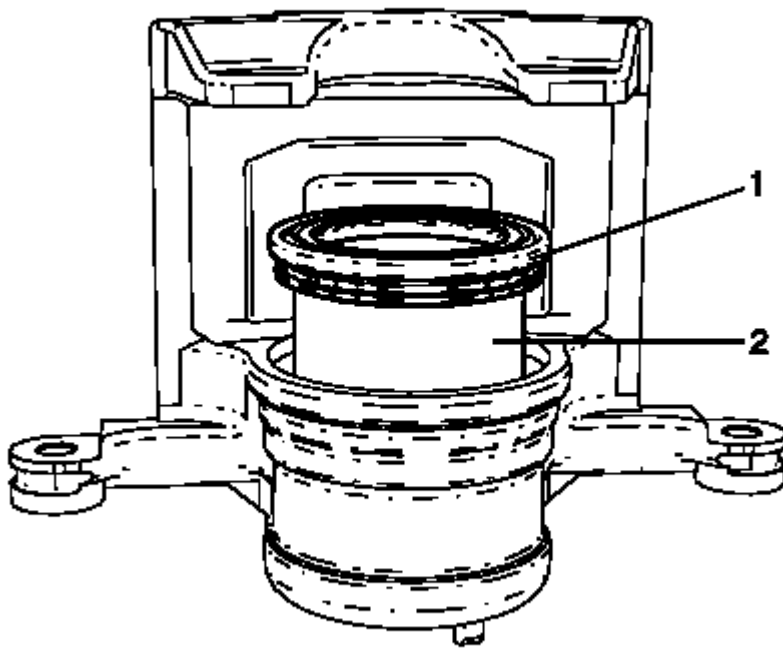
Piston Dust Boot Seal And Over Caliper Piston
